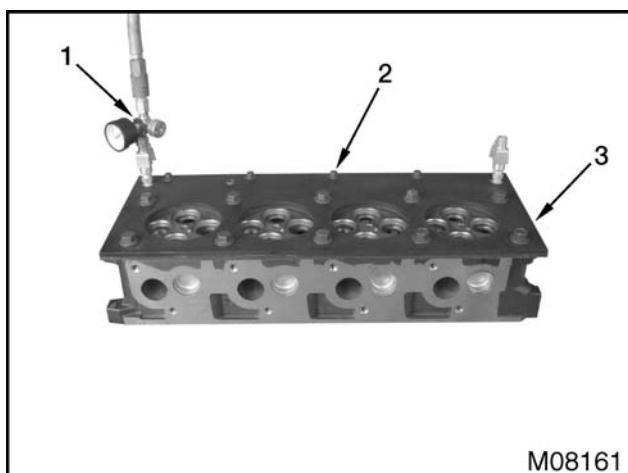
Cylinder Head Pressure Test Plate ZTSE4534
